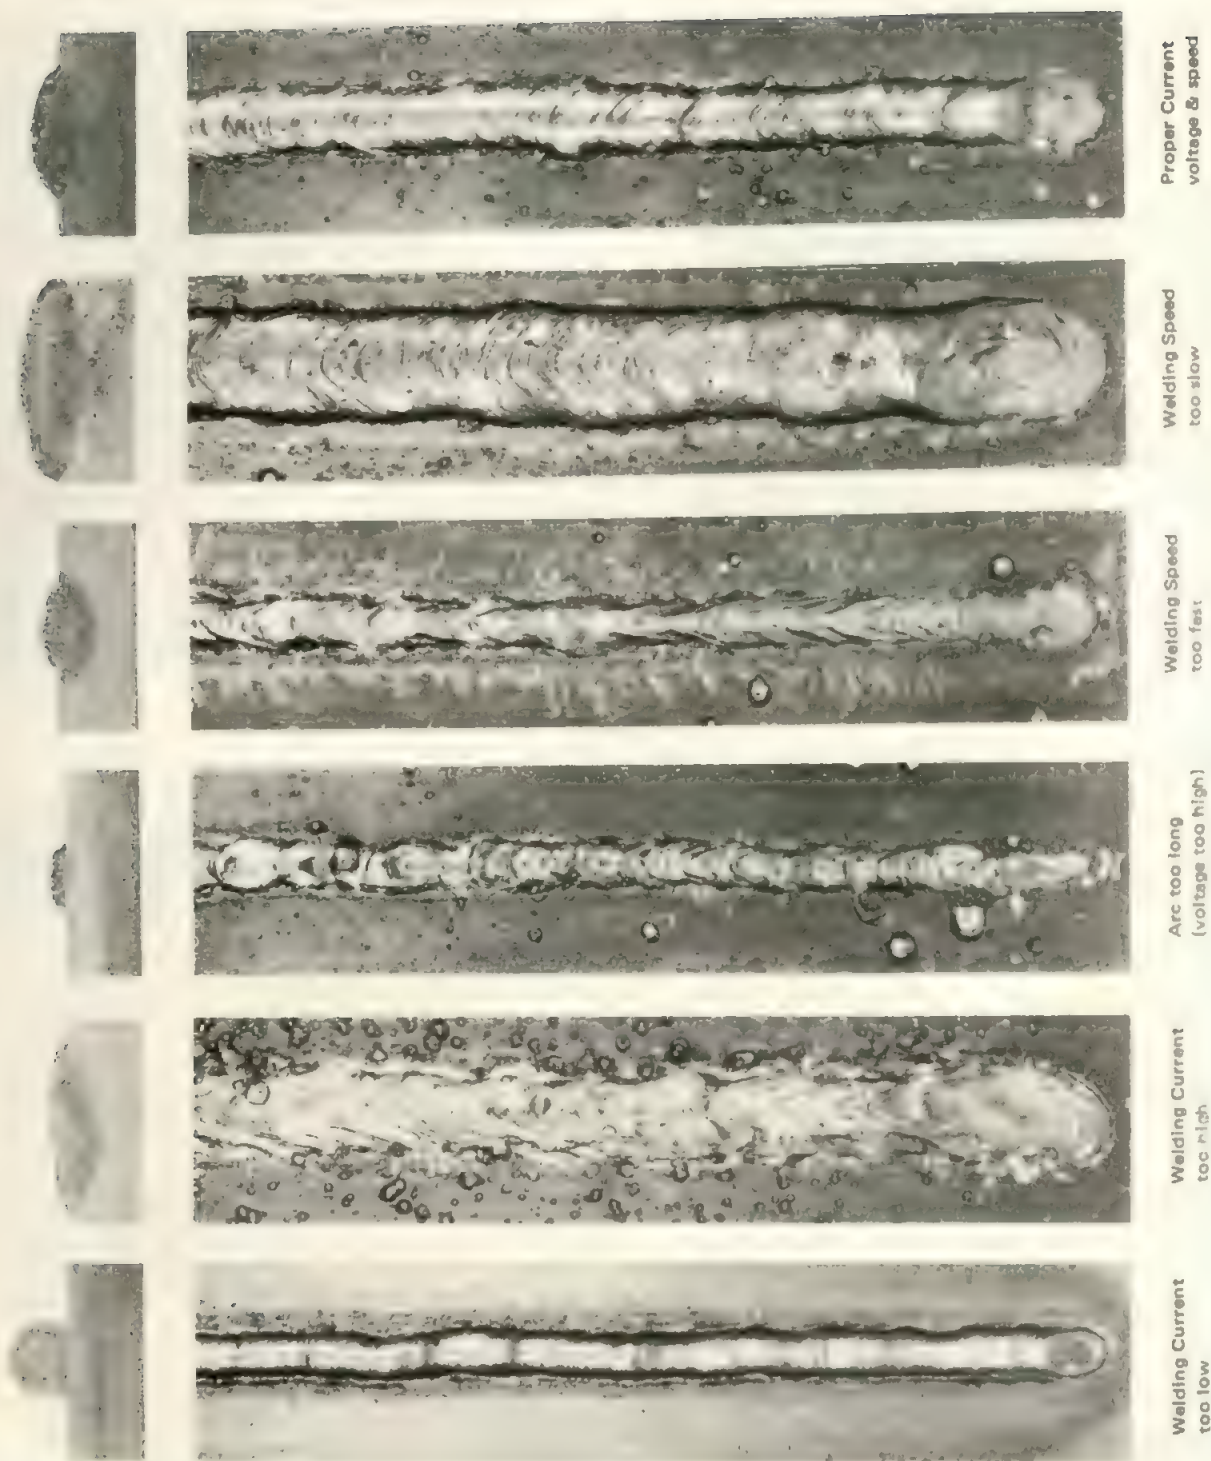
Welding examples relating to malpractices.
